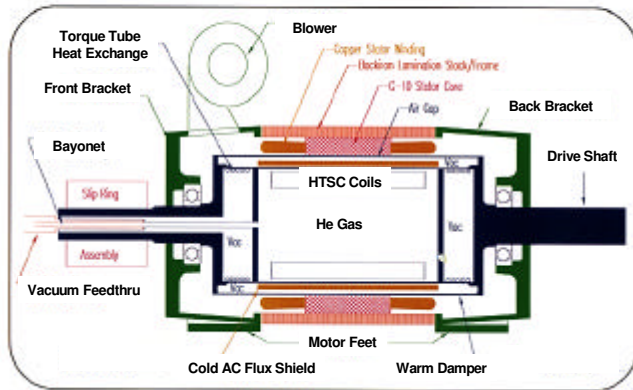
125 hp Reliance/DOE synchronous motor produced under sponsorship of the DOE Superconducting Partnership Initiative. This motor actually exceeded 200 hp on bench testing.
